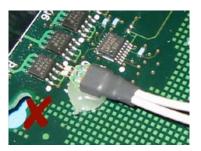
Incorrect Securing Method Because Glue is Placed on the Probe Head Tip
